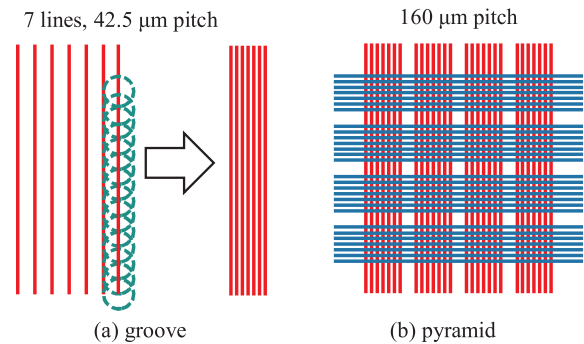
The laser irradiation scheme used for the machining of (a) a groove and (b) a pyramid structure.
